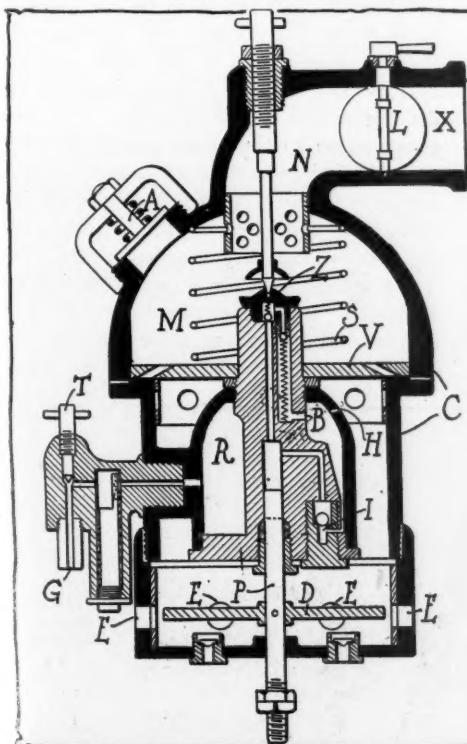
IVOR'S FORCE-FEED CARBURETER
